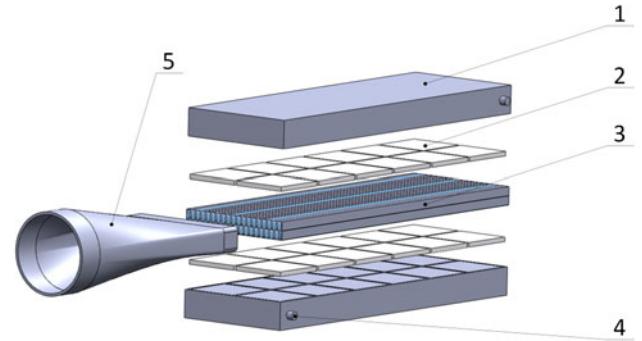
The configuration of TEG heat recovery system: 1, aluminum block; 2, TEG assembly; 3, compact heat exchanger housing; 4, coolant inlet/outlet; and 5, diffuser.
